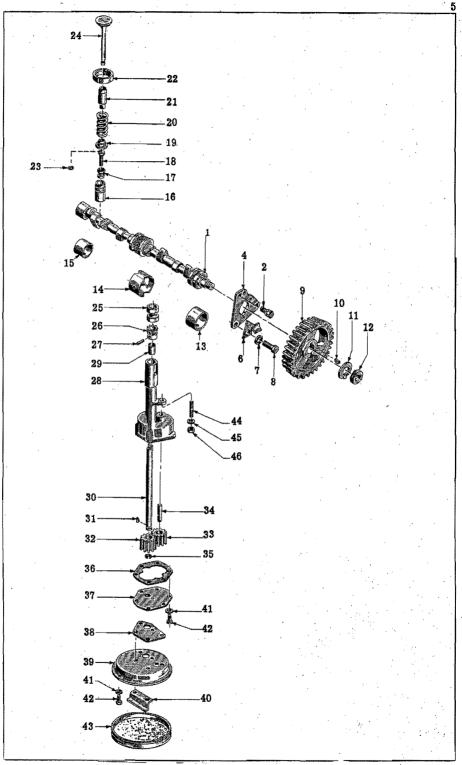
CAMSHAFT AND OIL PUMP PARTS GROUP
